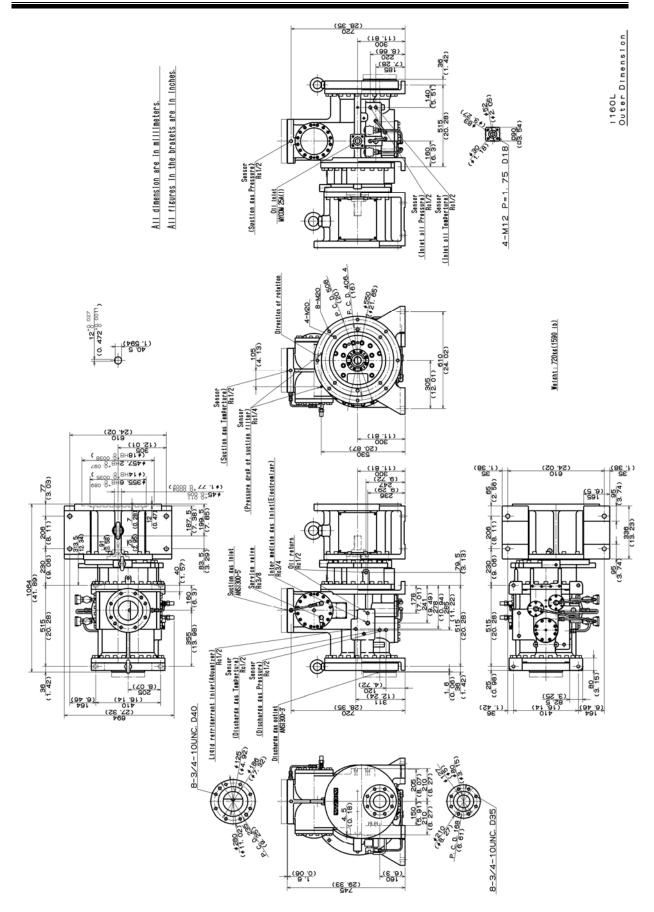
i160L Outer Dimensions with a Spacer for Flange Motor (NEMA)
